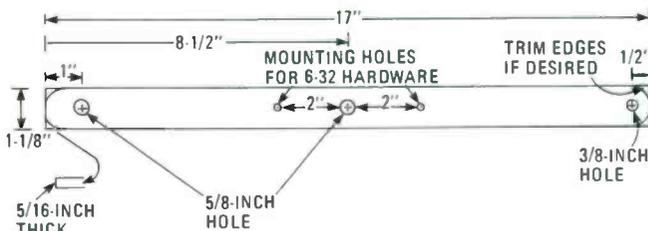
An alternative to creating a stand using this bar to group the unit's components, you may wish to attach all controls directly to the project cabinet itself.
